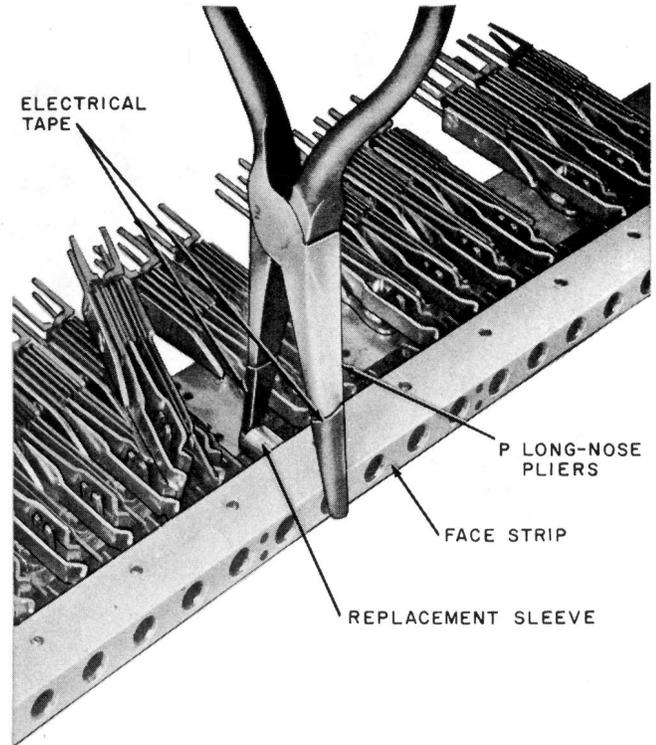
Method of Forcing Sleeve Terminal Forward into Jack Strip on 510-, 511-, and 512-Type Jacks
